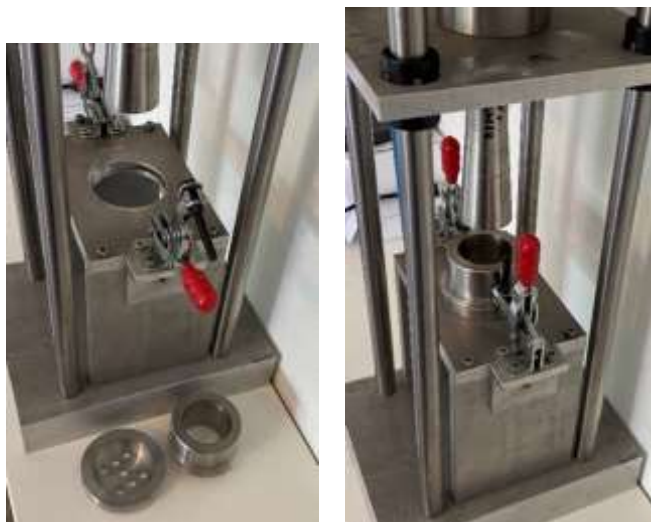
Placement of chamber and LL die combination in TCD extrusion apparatus: unassembled (left); assembled (right).
